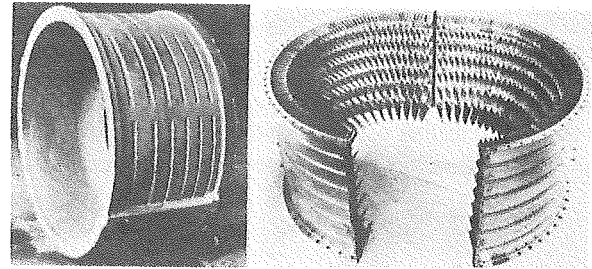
Compressor casing: (a) as cast; (b) finished; machined, assembled, and bladed
